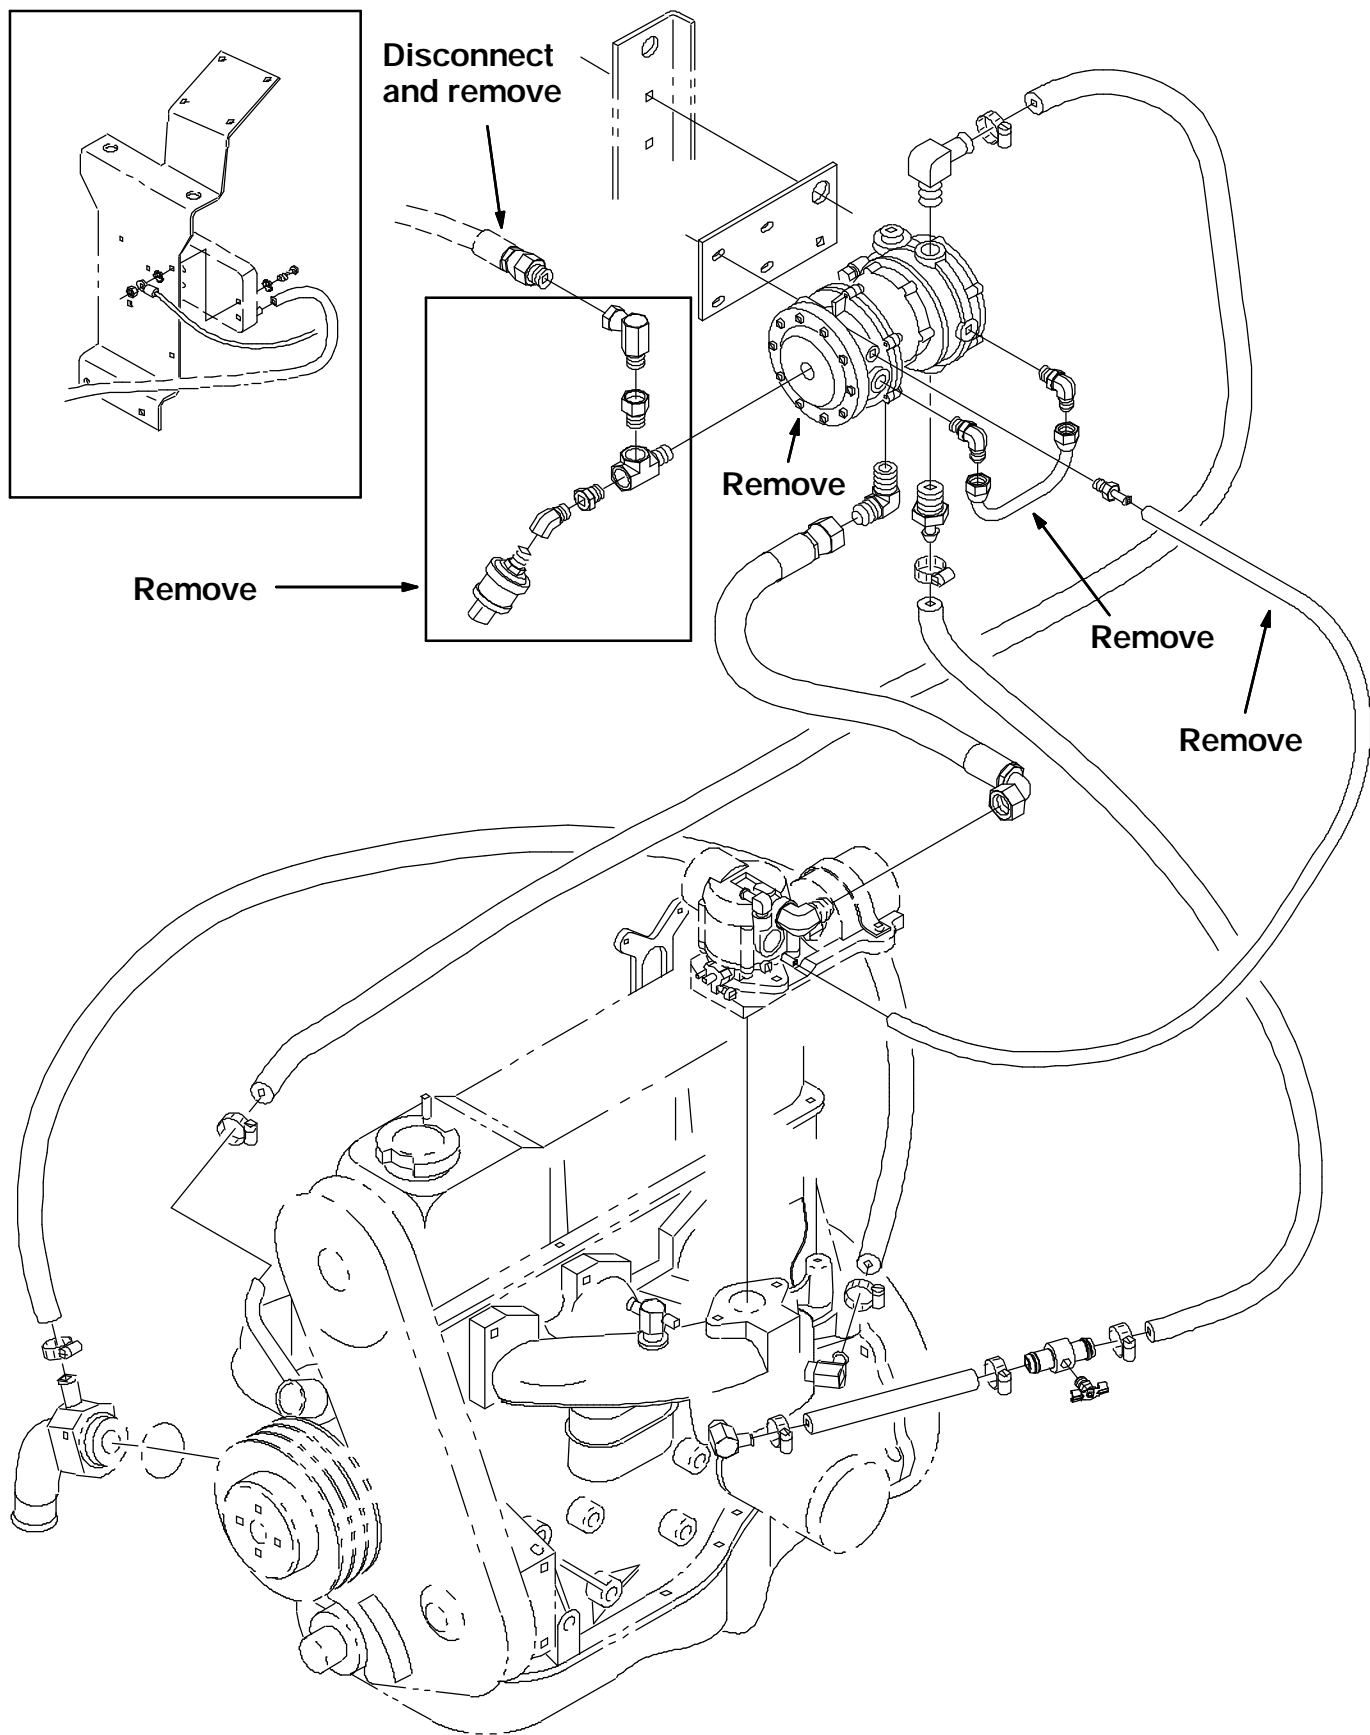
OLD FUELOCK FILTER GROUP REMOVAL
